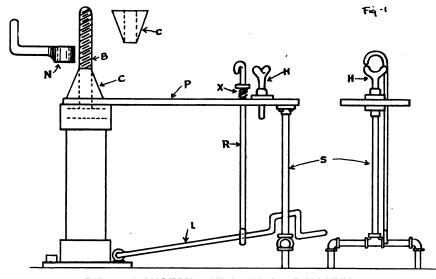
A MODERN WHEEL HOLDING MACHINE
